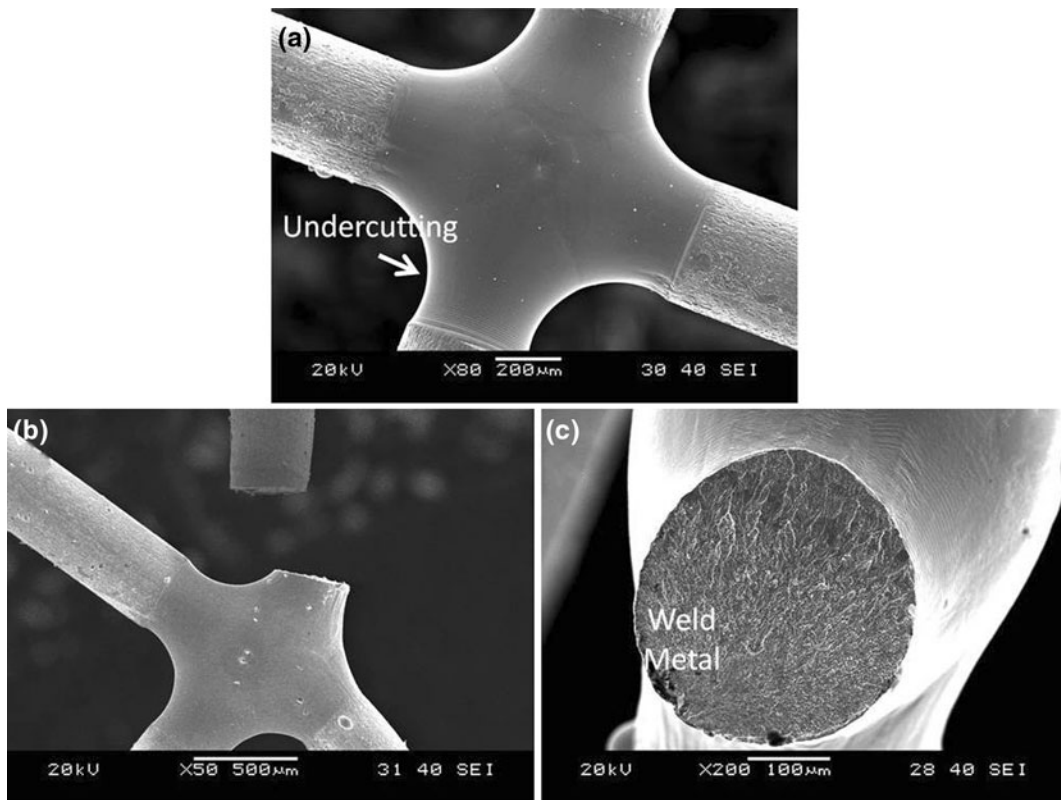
SEM images of welds made at 1.6 kW peak power for the (a) weld top, (b) weld bottom, and (c) fracture surface.
